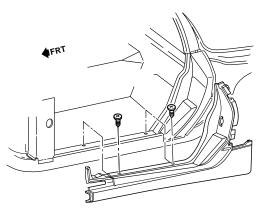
Install Screws to Secure Panel While Adhesive Cures. Also Apply Adhesive to the Lower Edge of Rocker to Bond at Bottom Side of Rail.
